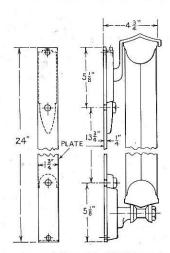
Arco Adjustable Wall Bracket, No. 2 Single. For 7-B Sections of American Peerless Wall Radiators.
